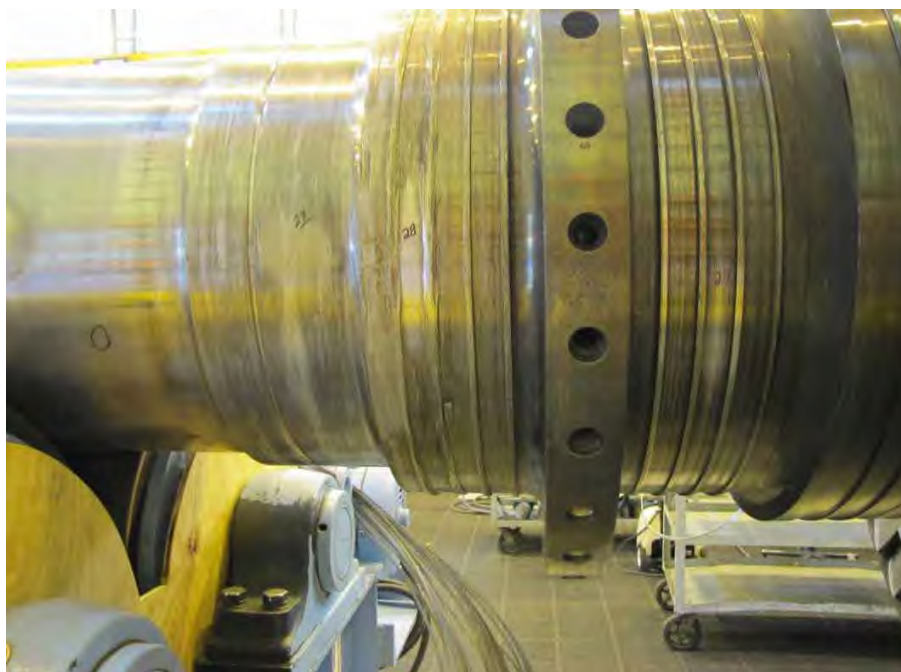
Close-up photograph of intermediate pressure turbine rotor showing light to moderate rub damage on seal surfaces.
